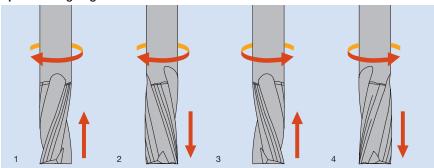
RH-RD positive twist, workpiece face side to bottom, good chip flow into dust extraction.
